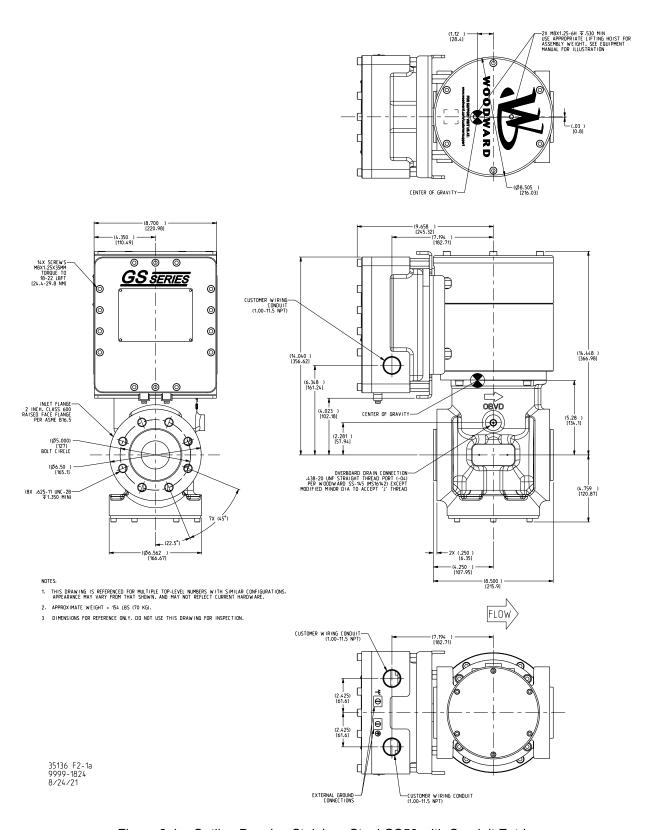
Outline Drawing Stainless Steel GS50 with Conduit Entries
